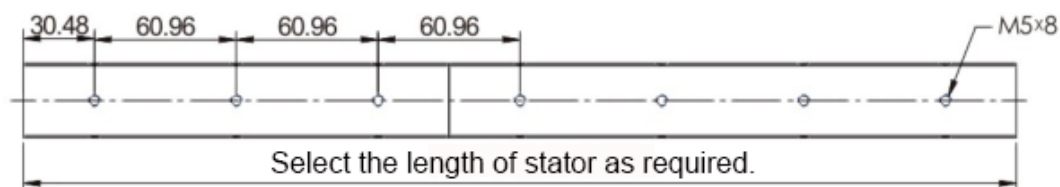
Dimensional drawing of WZCR-U30 series stator
